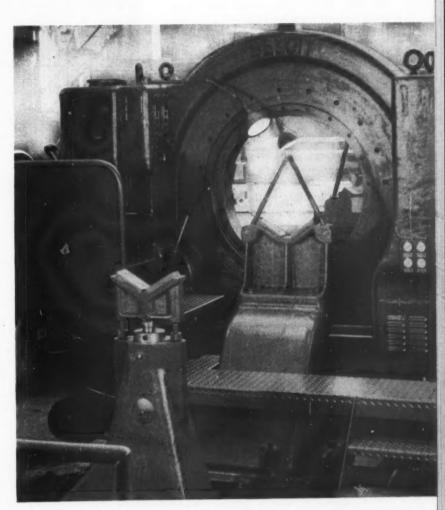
Main-drive motor is flange mounted to ring housing as shown in this rear view of the main-ring carriage
